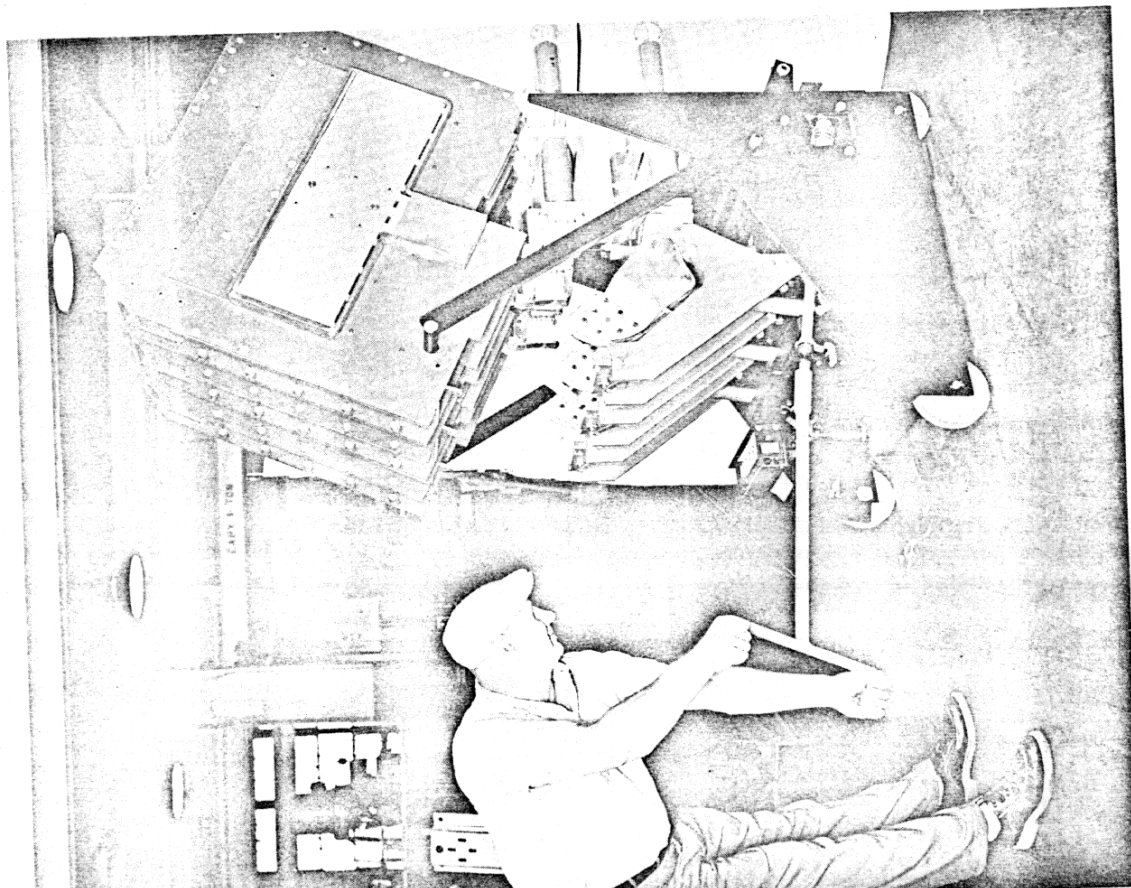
1,000 MVA Breaker with Arc Being Raised with Chute Lifting Attachment. Crank being used is regular levering in device crank attached to regular levering in device shaft.
